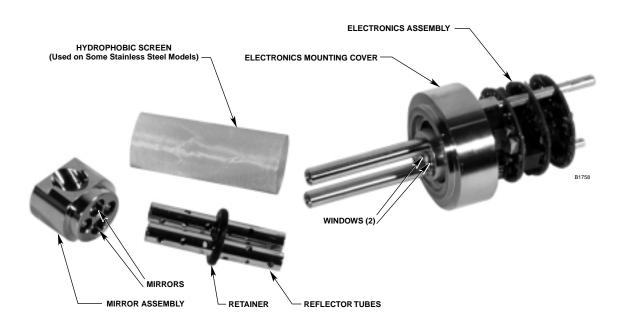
Stainless Steel PointWatch Detector Disassembly for Cleaning
